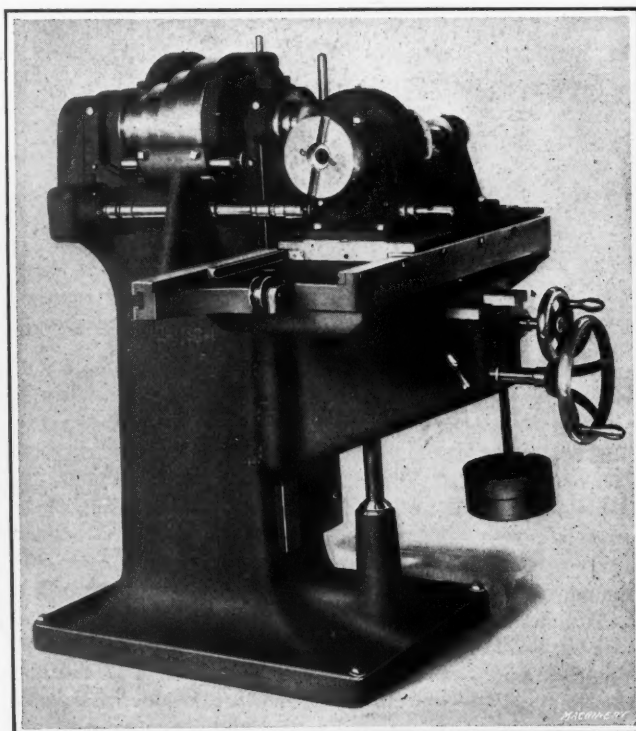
Garvin Cam Milling Machine equipped for cutting Cylindrical Cams
